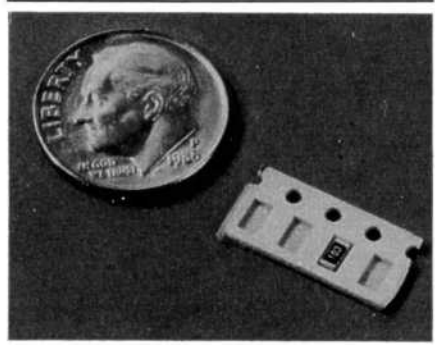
A resistor lies in its 8-mm wide package waiting to be plucked by an automated pick-and-place machine.
